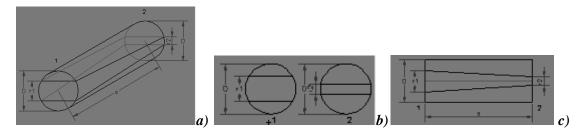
Shape of the proposed dilatometer a) axonometric; b) frontal section; c)lateral section.
